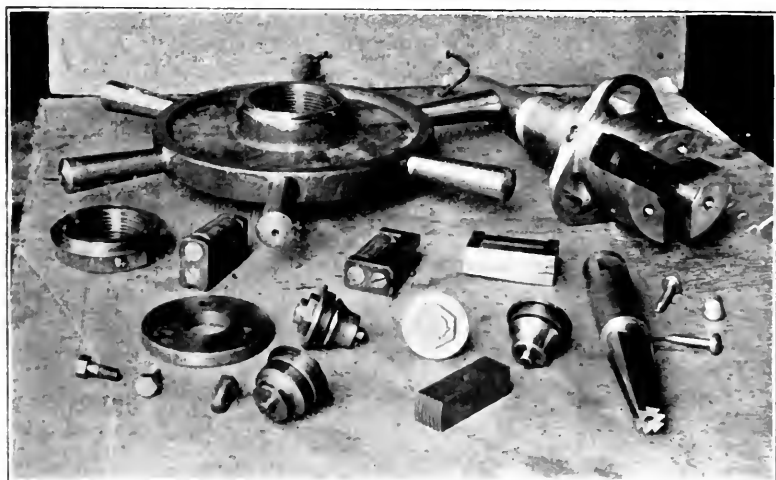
Details of Lovekin expander and beader for light metal tubes.
